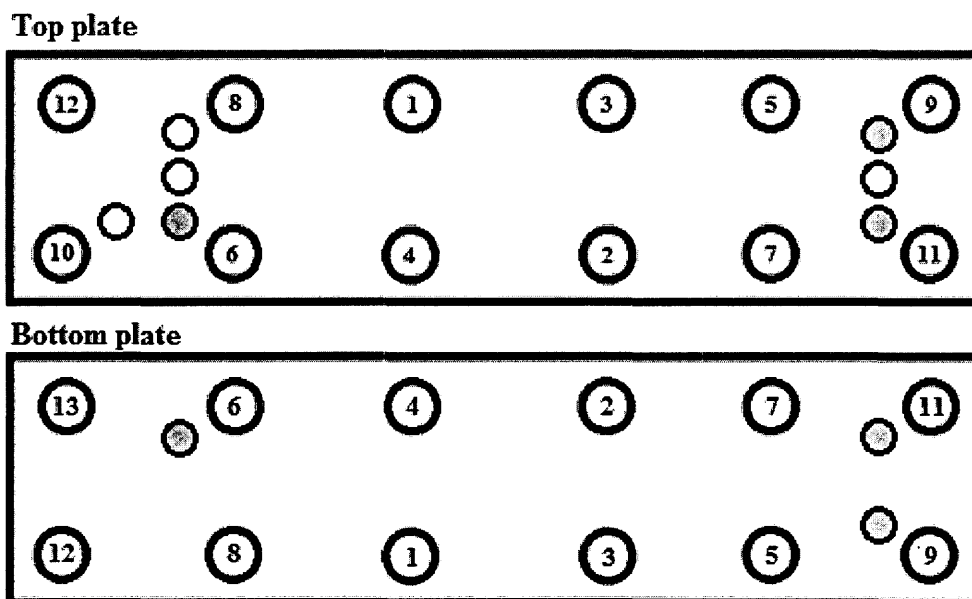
Torque screw diagram for 3<sup>rd</sup> generation flow device. The larger numbered circles represent the top plate screw holes which are not threaded, while the bottom plate screw holes are threaded so pressure sealing is achieved through compression of the plates upon the PTFE gasket. The above diagram also shows the mirrored numbering of the top and bottom plates denoting the arrangement of the plates once assembled. The unlabelled smaller circles represent the 1/4-28 fluid ports, while the grey color ports denotes fluid port overlap.
